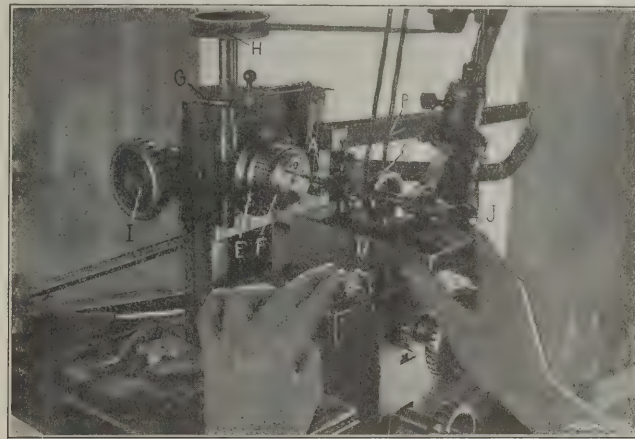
Damaskeening Machine of the Upright Type for Decorating Bridges, Plates, etc.
